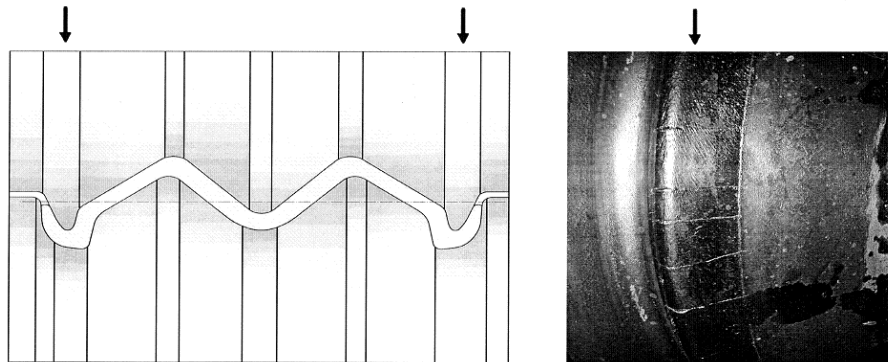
Fire cracks rolling sheet piling <sup>(3)</sup>.
